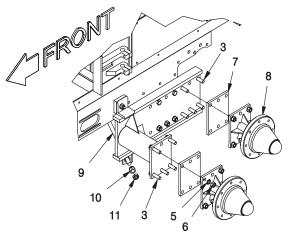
Mounting Spacer Plates, Hubs & Truss Rod
